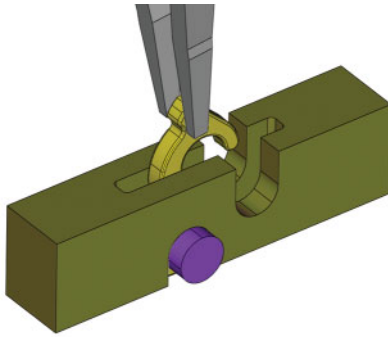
REMOVE THE CONTACTS USING A NON-METALLIC TWEEZERS.
